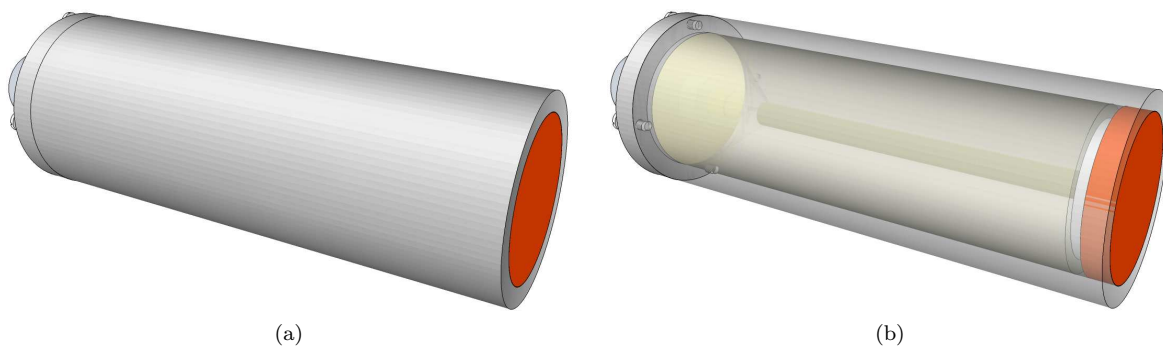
Sketch of (a) the assembled transducer and (b) transparent view of the assembled transducer.
